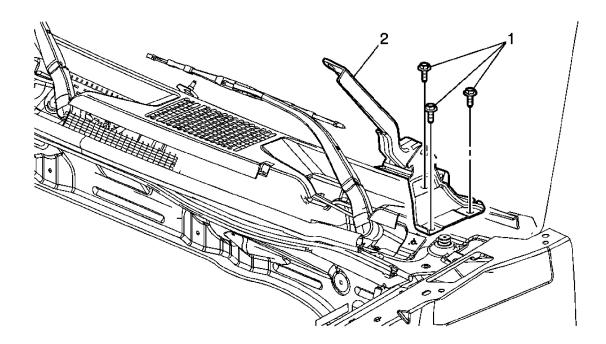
Hood Hinge Replacement Courtesy of GENERAL MOTORS CORP.
